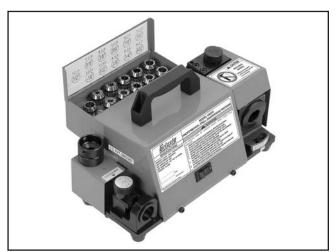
Model H8203 Professional Drill Bit Sharpening Machine.
